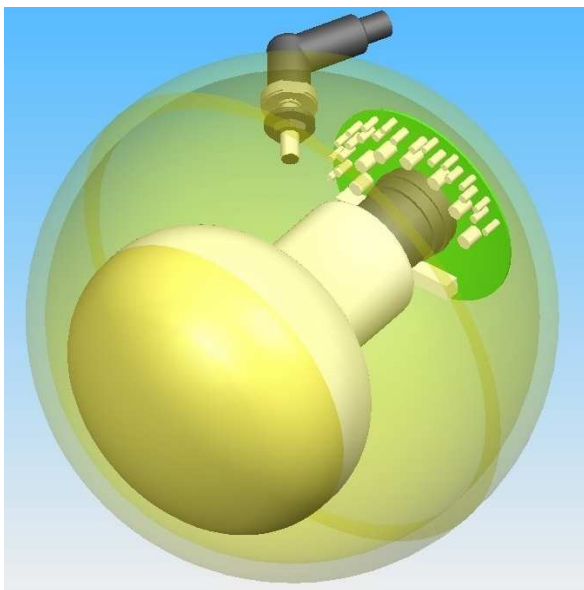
Design of an optical module consisting of a 13-inch glass sphere and an 8-inch hemispherical PMT. The PMT is connected to the inside of the sphere using optical gel. No mu-metal shielding or valve are planned to be implemented. The bulkhead connector for voltage supply and signal lead is situated at the top of the sphere.
